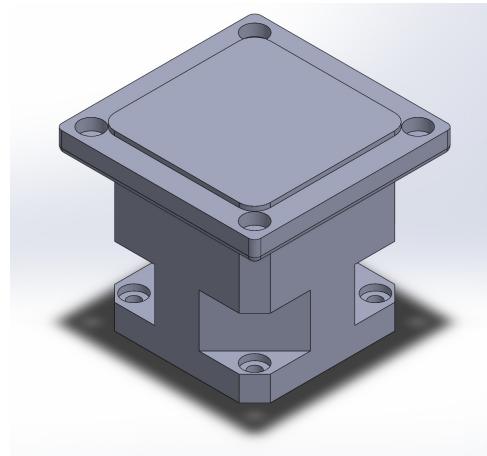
Solidwork's Isometric Bottom view of J.K Coldfinger.
